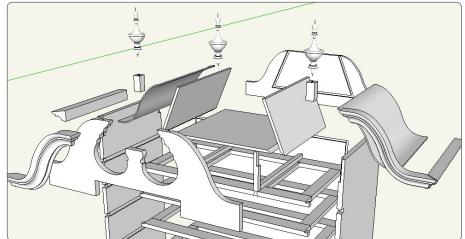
The case for the American highboy and an exploded view of its bonnet.
